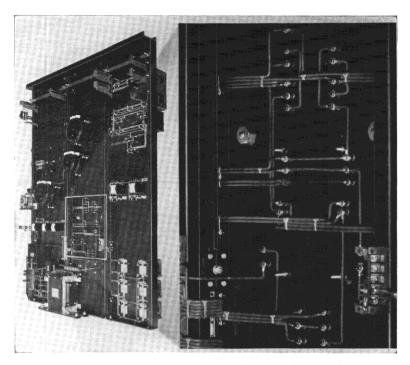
Rear of Steel Panel Switchboard Showing Method of Wiring.
